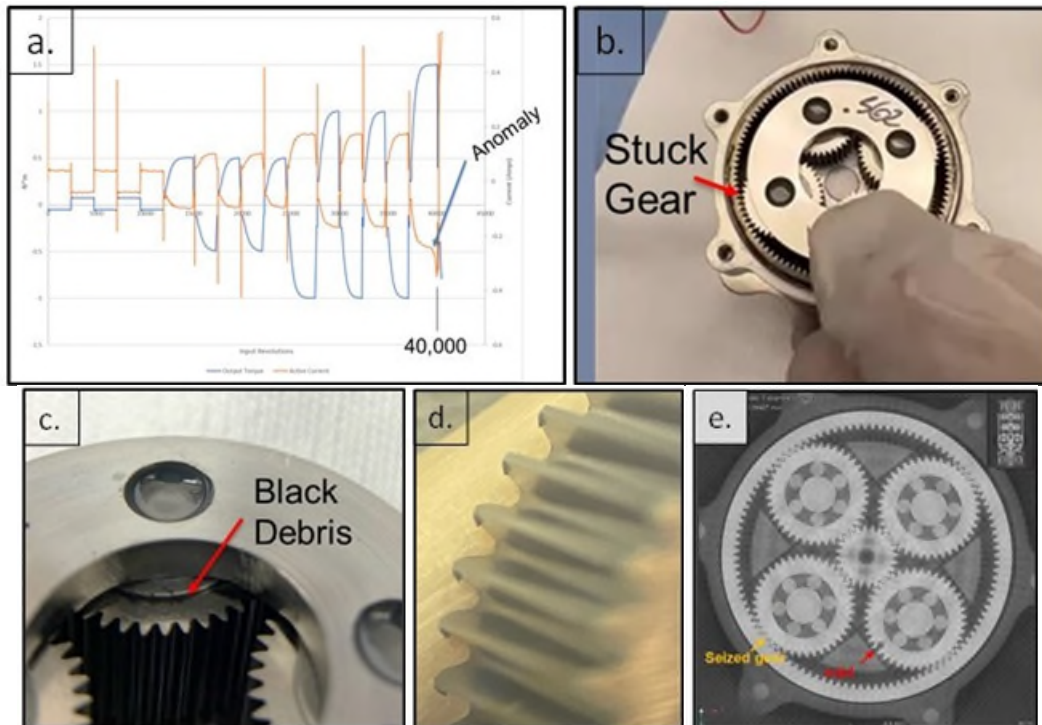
(a) Plot of output torque and motor current from ambient gearmotor run-in at the beginning of testing with occurrence of anomaly indicated after ~40,000 motor revs. (b) Stuck gear in the 1st stage planet carrier assembly. (c) Noticeable debris at the edge of the gear shim. (d) Optical image of burrs on the planet gears prior to use. (e) X-ray CT image of the 1st stage planet gear assembly showing a planet gear with a void just below a tooth root next to the stuck gear.
